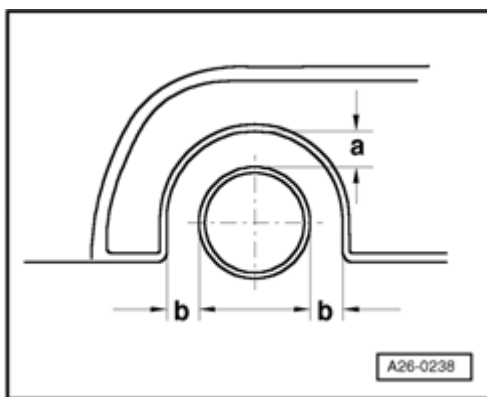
Aligning Tailpipe In Bumper Cut-Out
